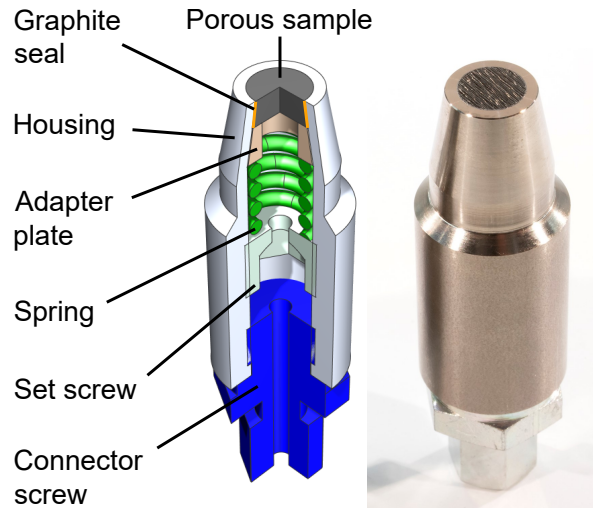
Transpiration cooling sensor head schematic (left) and photo (right)
